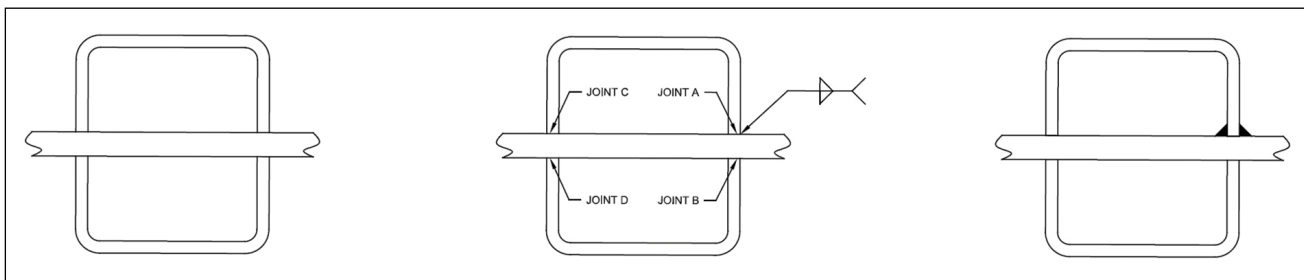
Slotted tube and plate with welding symbol specifying a double fillet weld.
